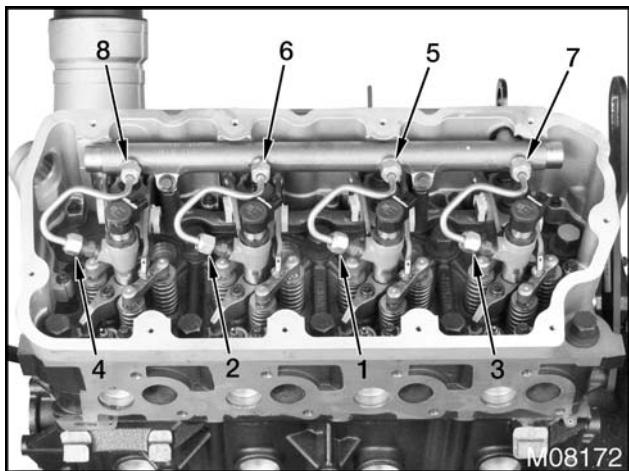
Fuel rail to injector tube assemblies tightening sequence (typical)
